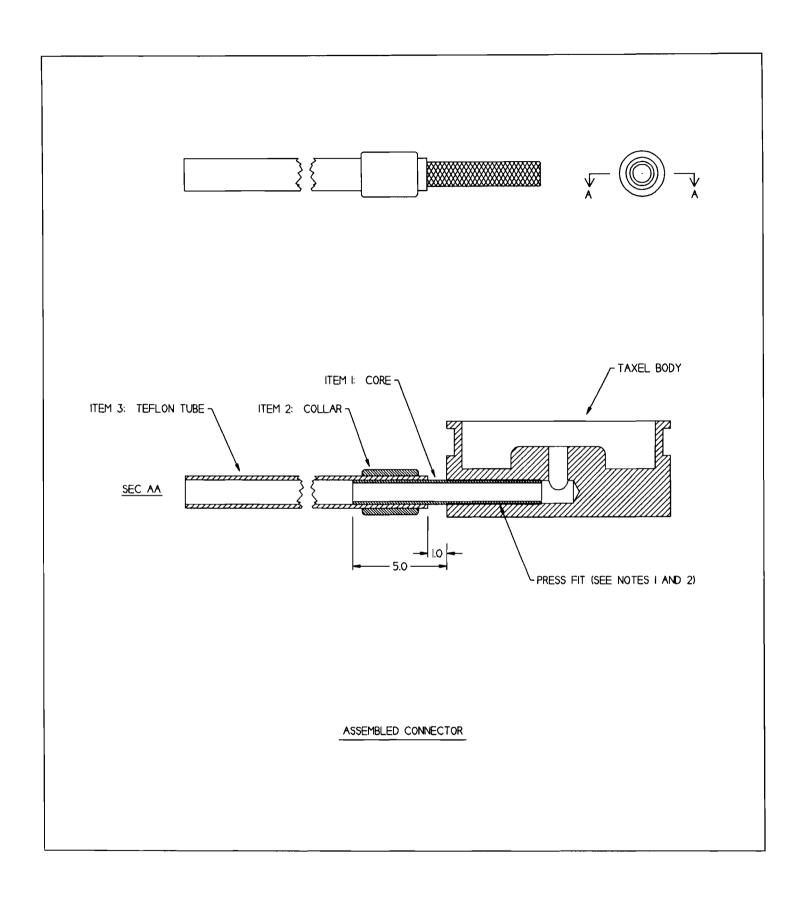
Assembly drawing of tubing adapter to taxel. Drawing TDRV3127-2.
